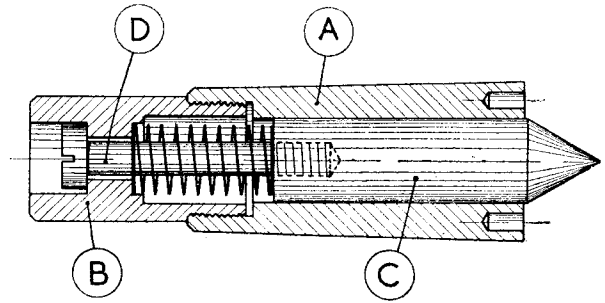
The pump centre. A—the body; B—the thimble; C—the sliding centre; D—the retaining-screw
